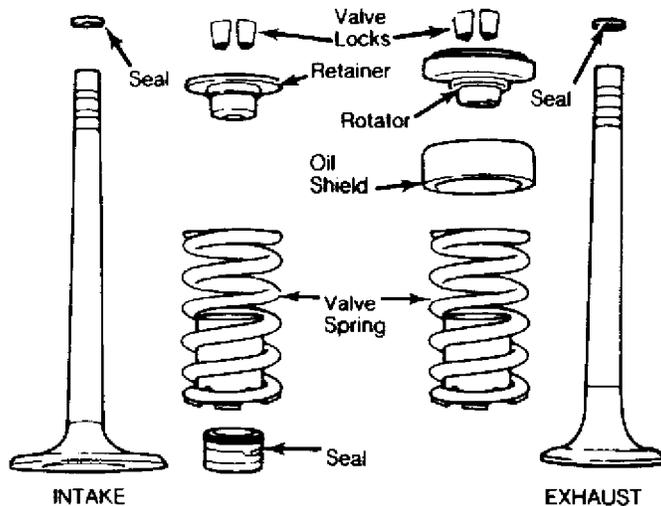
Exploded View of Intake & Exhaust Valve Assemblies - Typical
